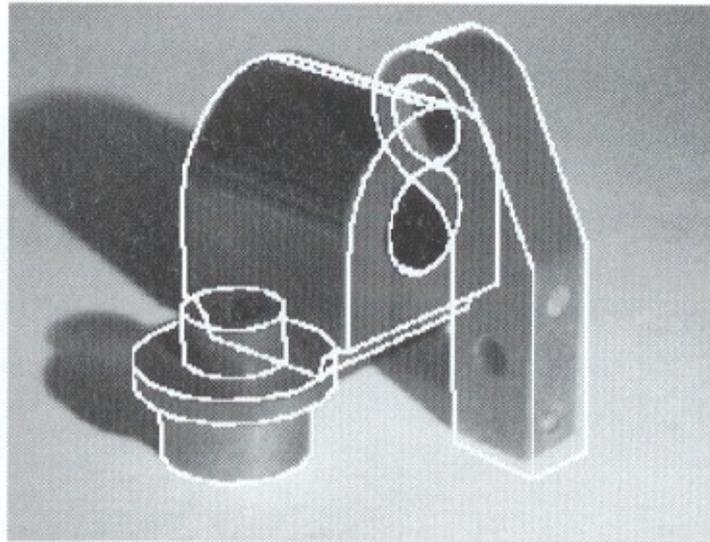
An inspection or assembly robot matches stored 3D models to a sensed 2D image
